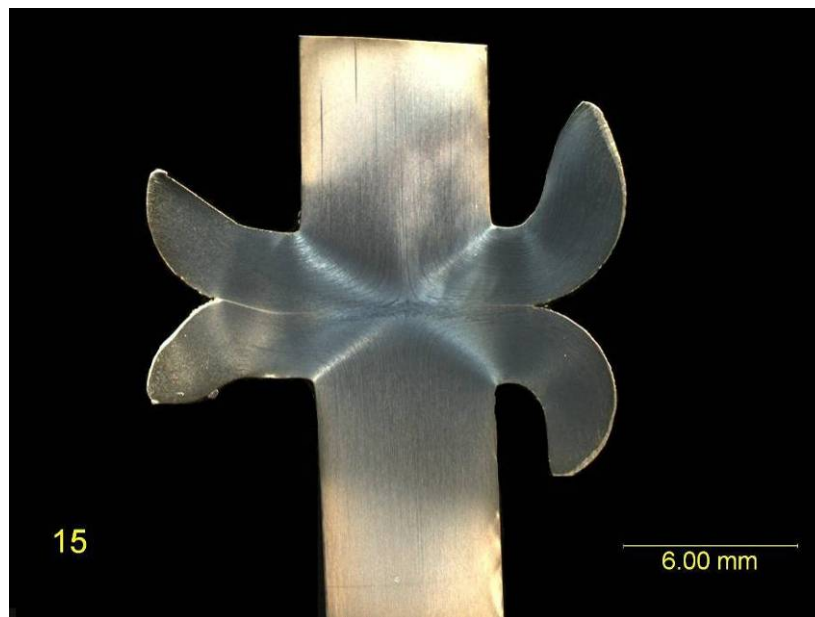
Macroscopic View of Typical Flash Butt Weld Joint
